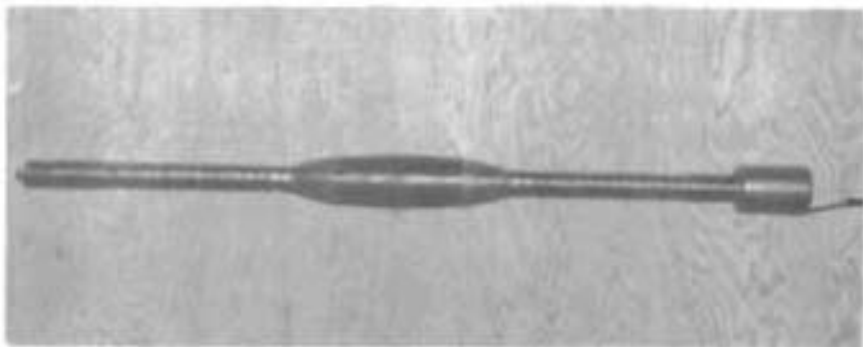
Steel Tube and Brass Sleeve, Assembled
